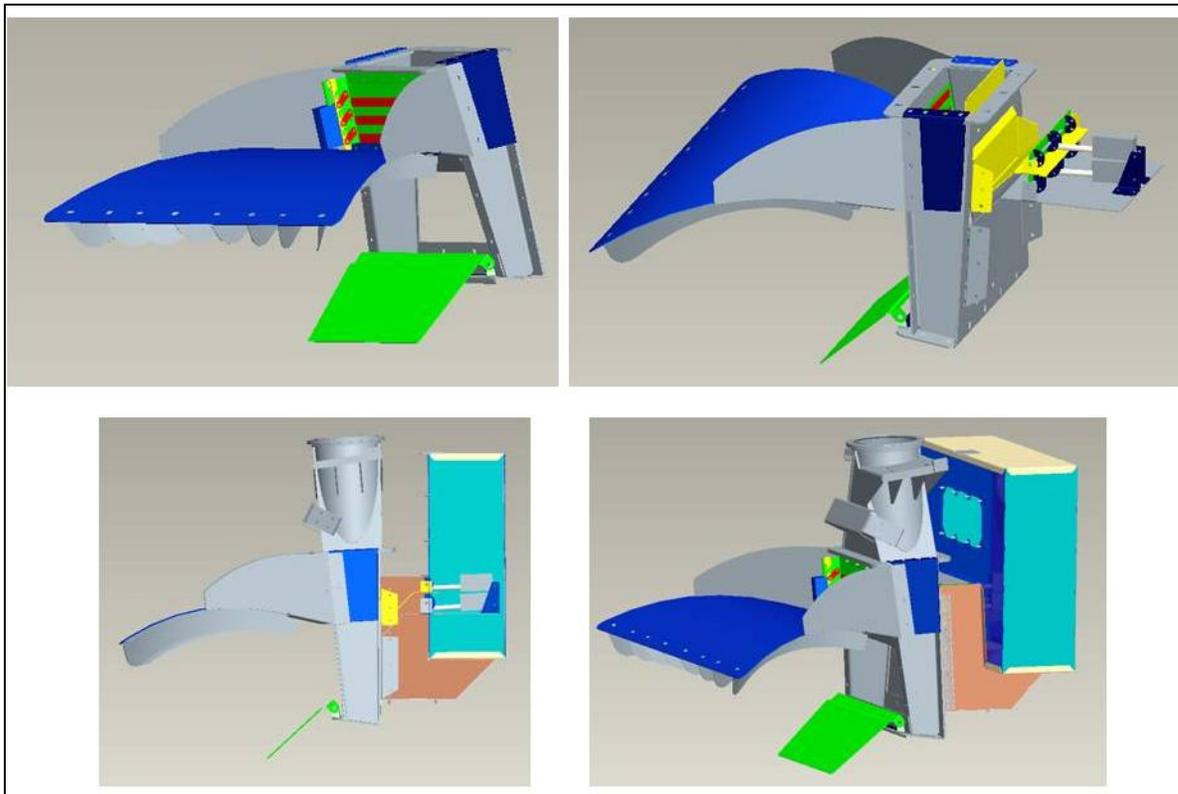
Pro/E models showing the residue spreader, top and bottom plates, transition door, and the louver assembly.
